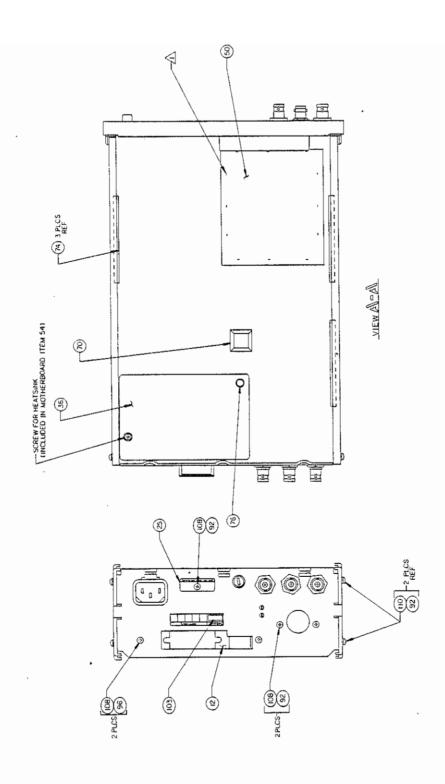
B - Chassis Assembly 404506 Rev. D (Cont'd)
